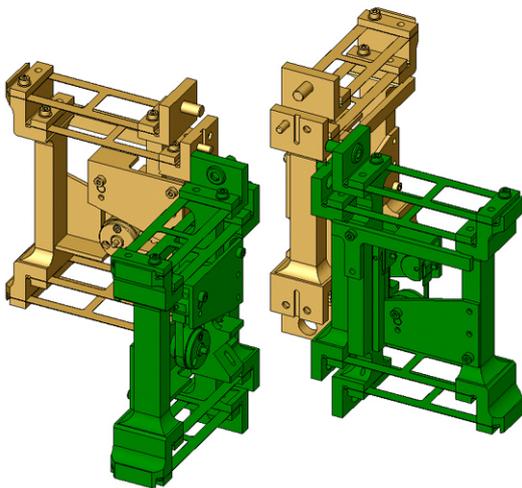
Leaf spring axial bearing, arranged with four bearing modules in cruciform.
